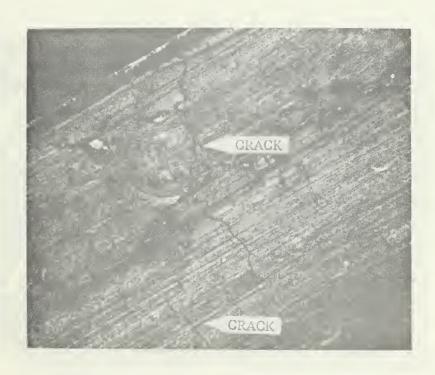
FIRST CRACK, SPECIMEN #8, 100X
